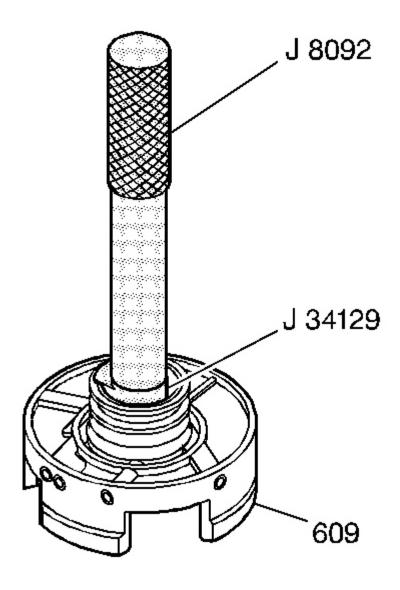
Removing Driven Sprocket Support Bearing Assembly Courtesy of GENERAL MOTORS CORP.
